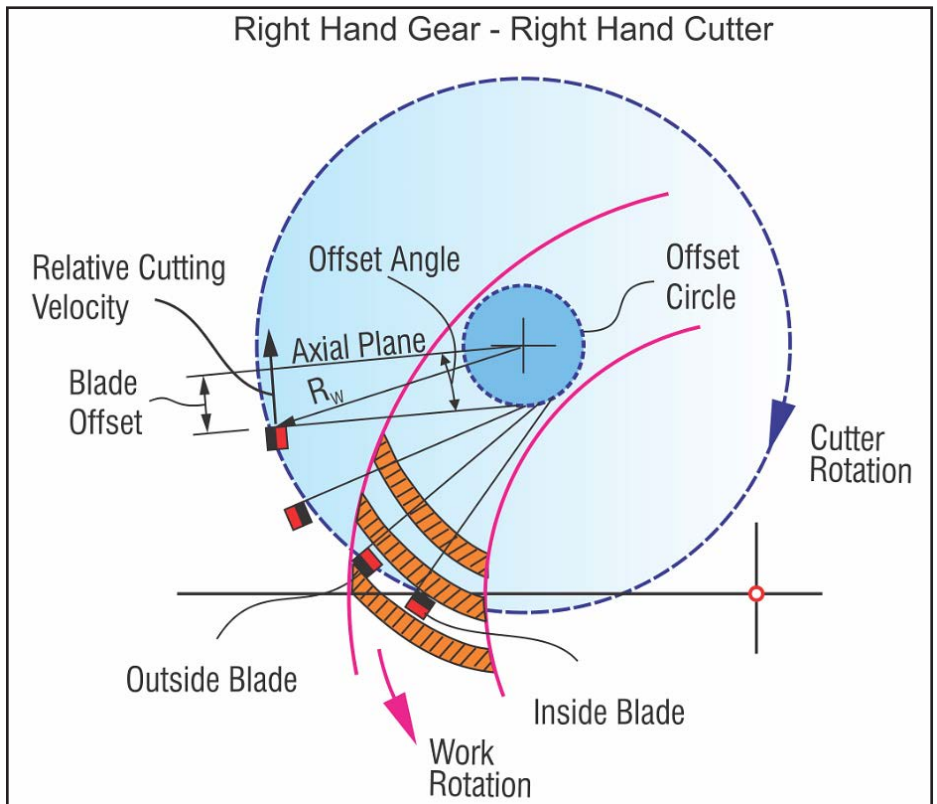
Face hobbing, right-hand gear with right-hand cutter head.
